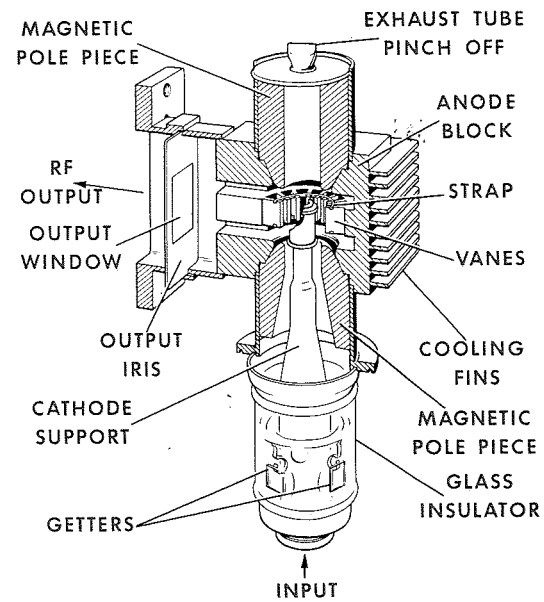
Cutaway view of the RCA-6521 magnetron.
